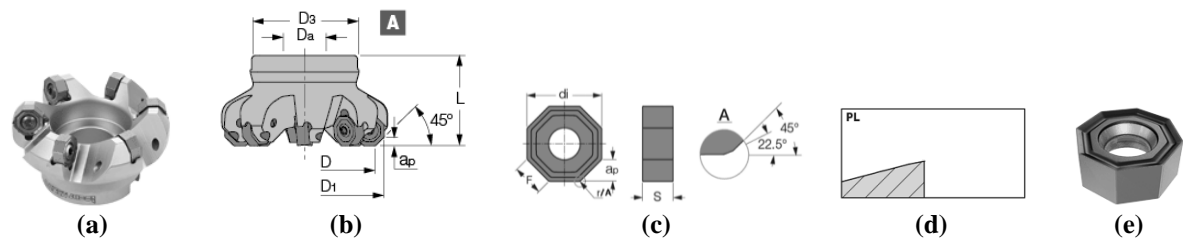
(a) Photo of ISCAR cutter to be use in machining experiments, (b) dimensions of cutter, (c) dimensions of inserts to be used in machining experiments (d) sharp shape of insert edge, (e) 3D model of carbide insert to be used – adapted from (ISCAR, 2015)
